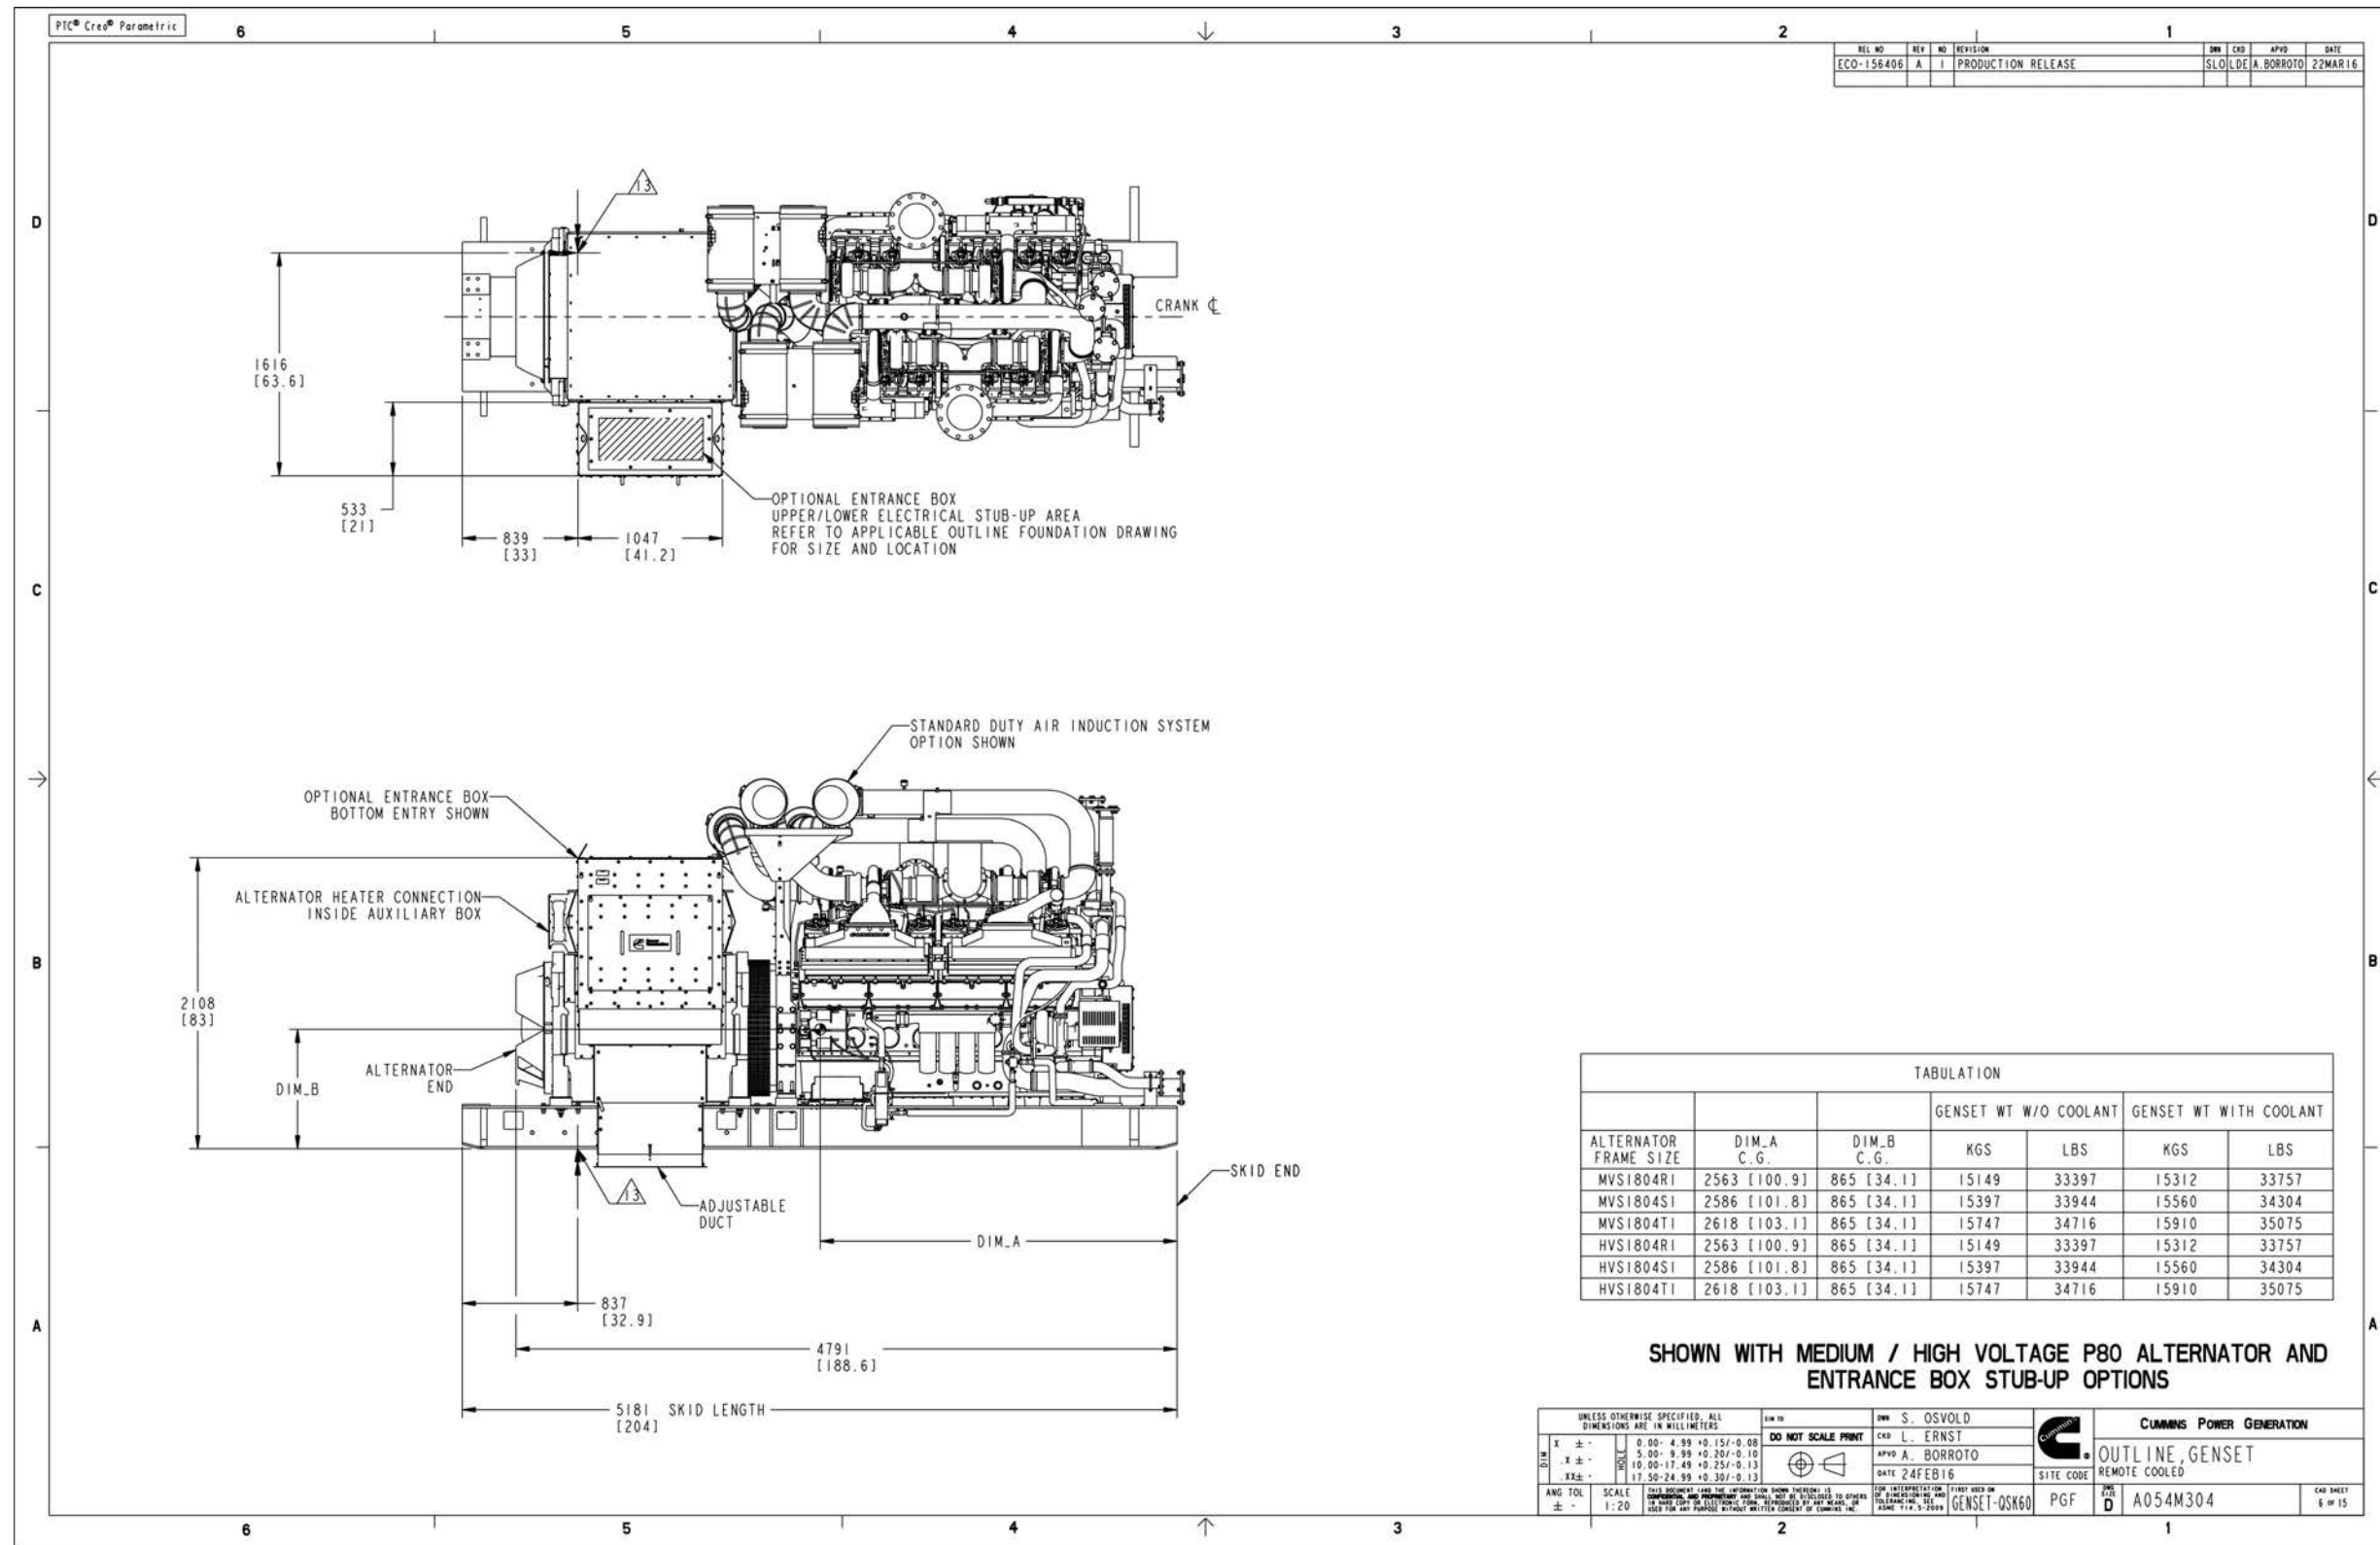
GENERATOR SET WITH REMOTE COOLING OUTLINE DRAWING (SHEET 6)
